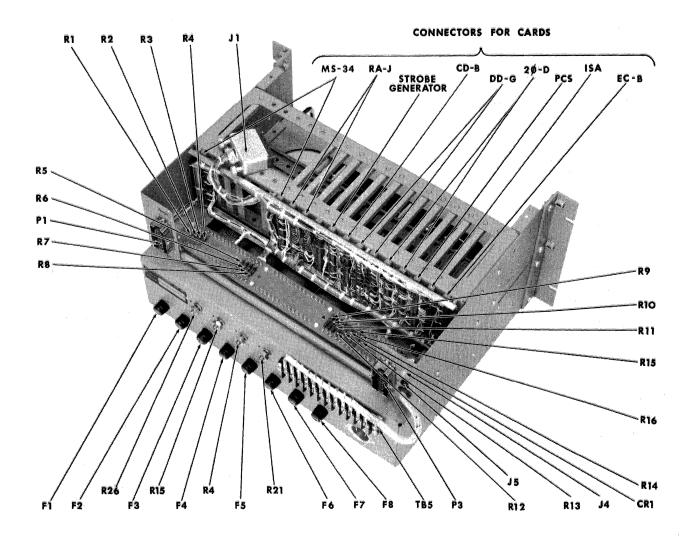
Buffer Parts Identification, Storage System, Magnetic Stepping Switches and Printed Circuit Cards Removed
